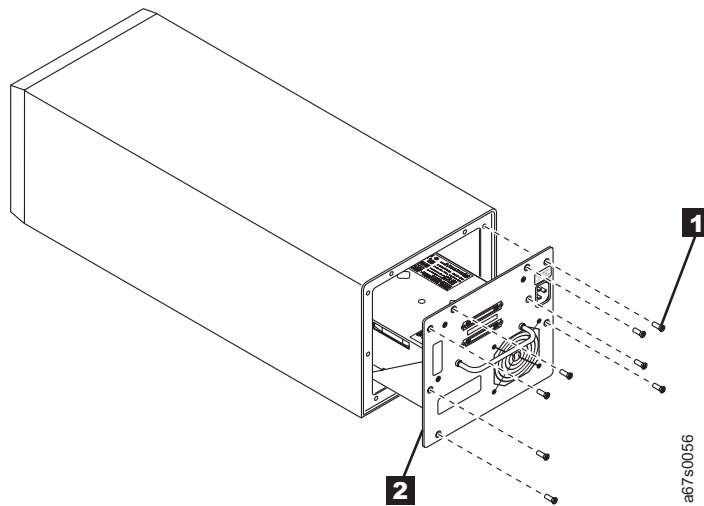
Removing the drive assembly sled from the 3581 Tape Autoloader
